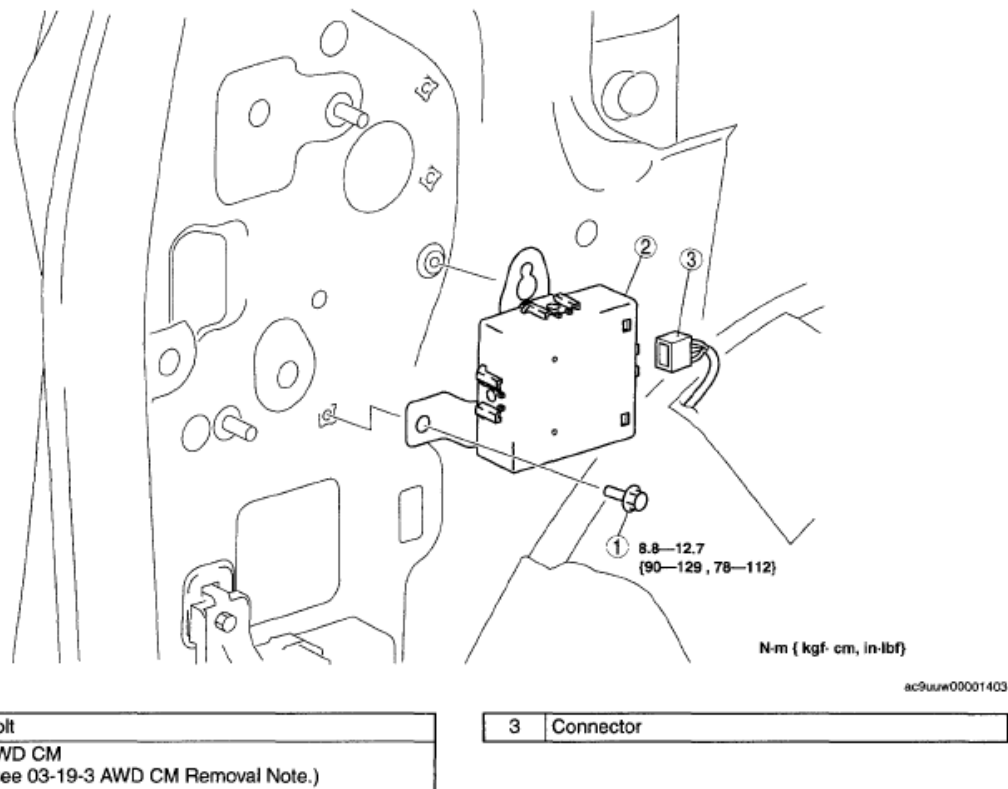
Identifying AWD Control Module Connector, Bolt & Torque Specifications
